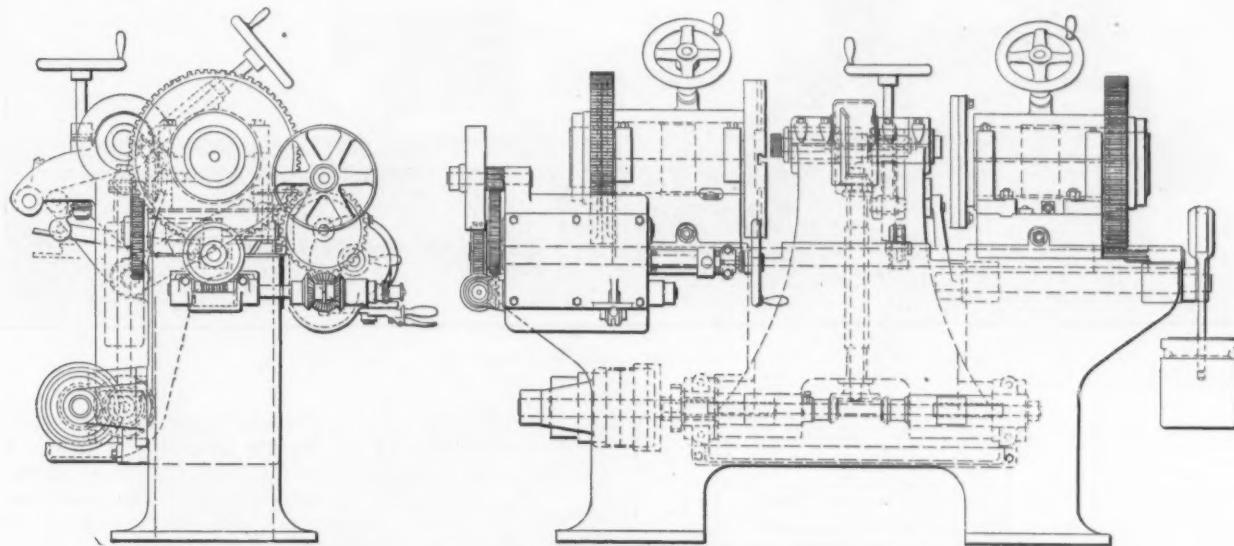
End and Front Elevations of the New Cam Cutting Machine.
